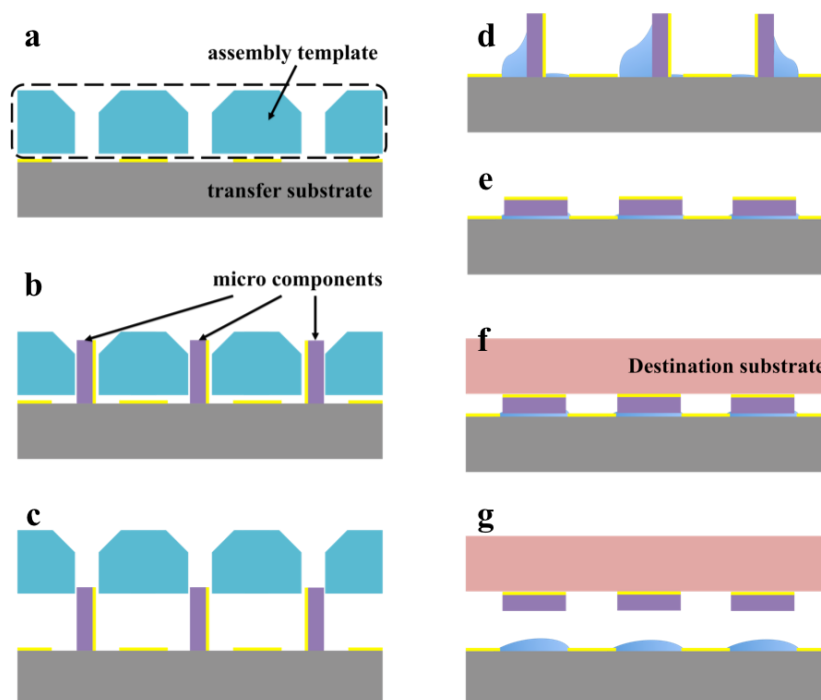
Assembly process flow: a. mount assembly template on a gold patterned transfer substrate; b. assemble parts; c. remove template; d. apply moisture; e. vibrate setup gently to have parts fall on hydrophilic side and self-align; f. attach parts to destination substrate/device; g. complete process by removing assembled substrate/device from transfer template.
